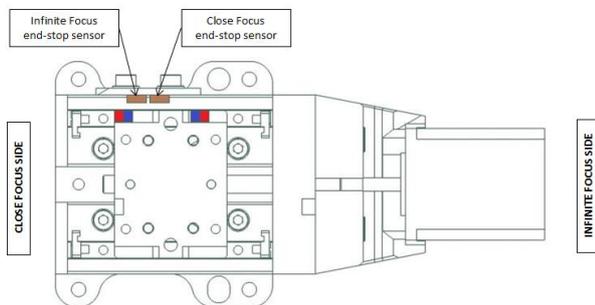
Upper view of the mechanism with the magnets and sensors positioning
